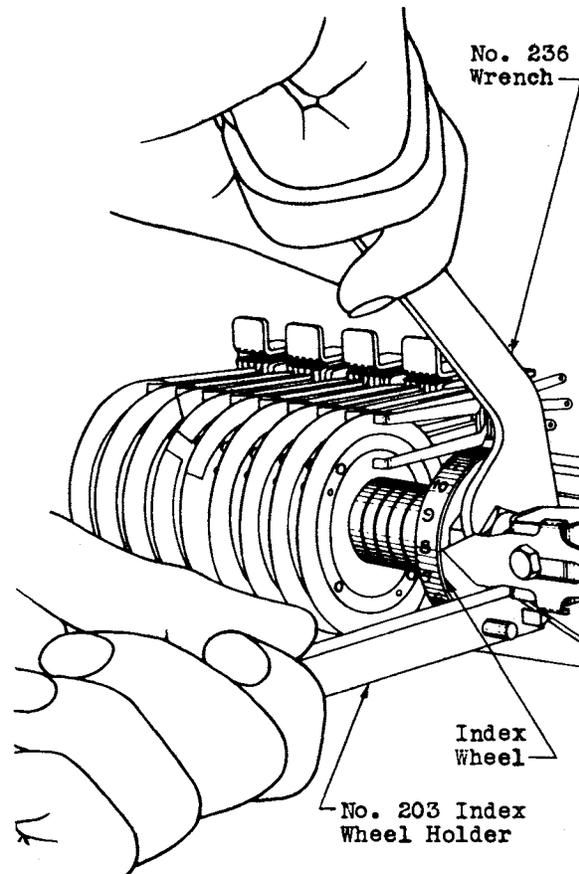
Loosening the Clamping Nut of the Cam Shaft Assembly
